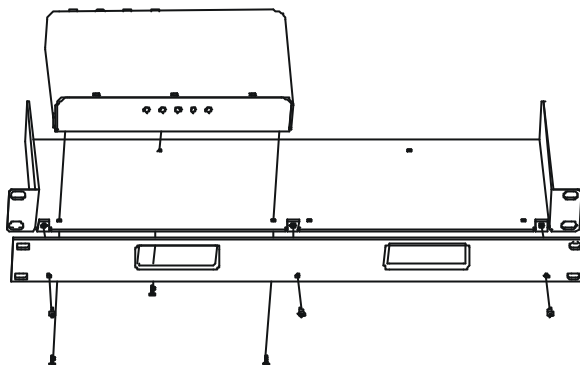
Tandem Horizontal Rack Mounting with Cat. No. 546
